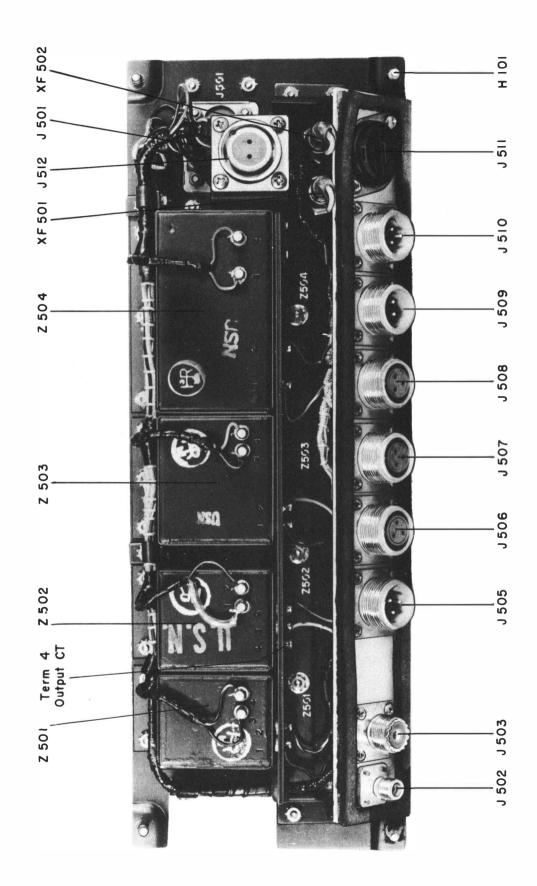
Converter Cable Filter Assembly RESTRICTED
